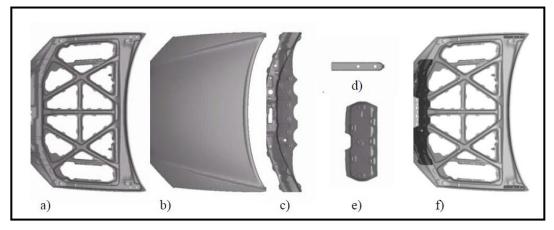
Components to be assembled into the hood assembly. (Thomas, 2010)
